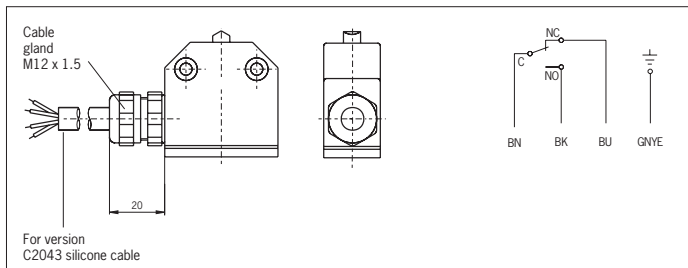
Dimension drawing/connection diagram NO1.550X... with connection cable (PUR cable, 4x0.5 mm²)
